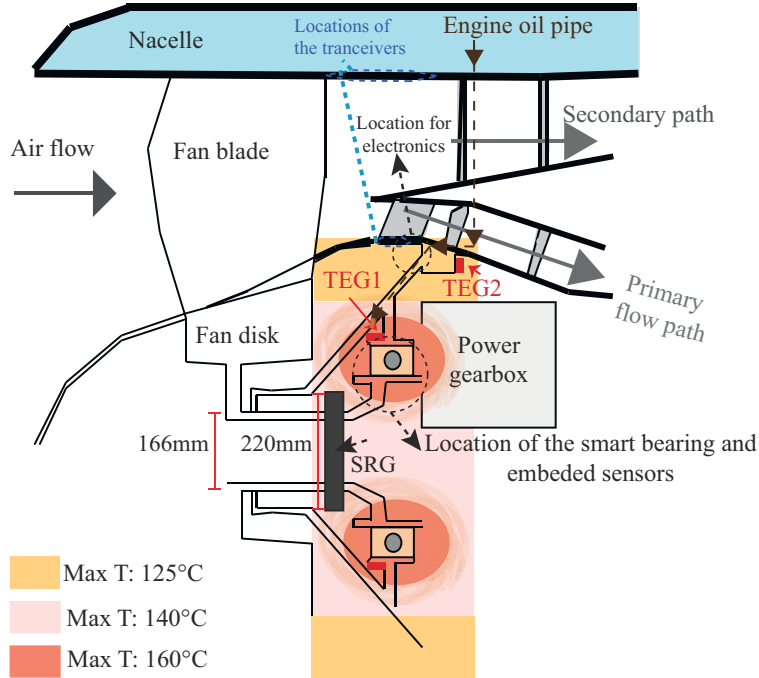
SRG and the smart bearing integrated in the engine. Schematic cross-section of the engine is provided by Safran Aircraft Engine.
